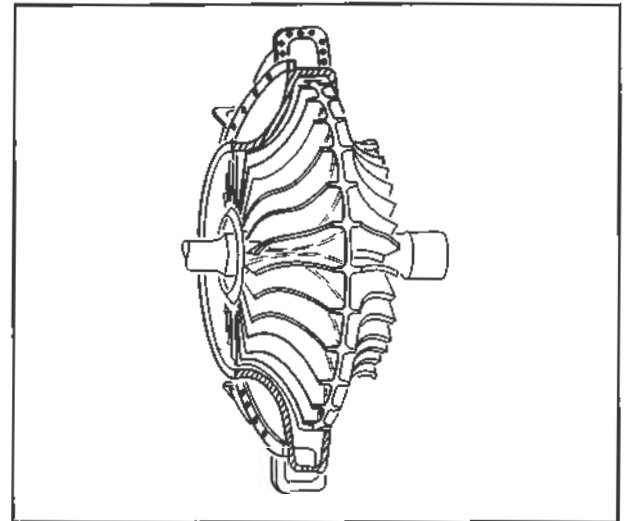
A single-stage, dual-sided impeller enables a small diameter engine to produce a high-mass airflow.
